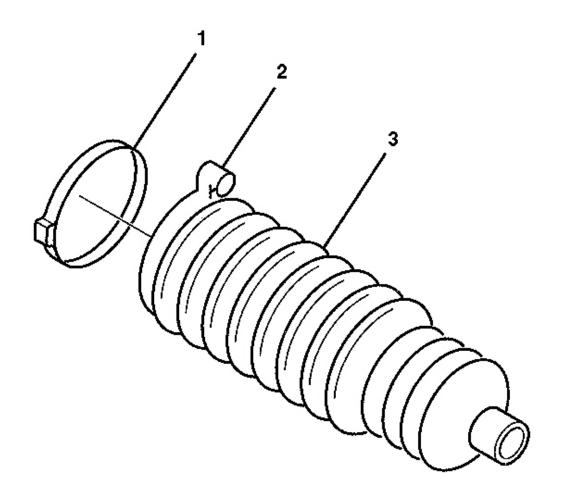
View Of Inner Tie Rod Boot Clamp Courtesy of GENERAL MOTORS CORP.
